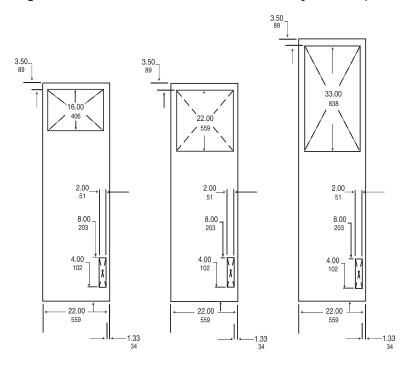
Bottom Conduit Entrance-Auxiliary Section (22-inch wide)
